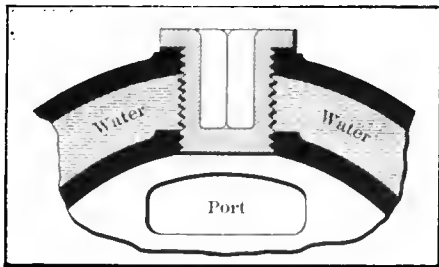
Section showing defective cylinder plug allowing water to enter combustion chamber.
